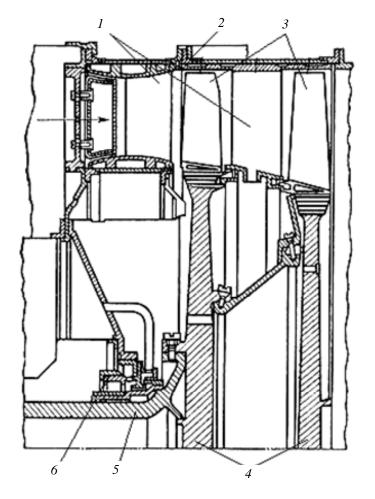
A two-stage axial turbine assembly: *I* — nozzle guide vanes; *2* — turbine casing; *3* — turbine blades; *4* — turbine discs; *5* — turbine shaft; *6* — bearing
